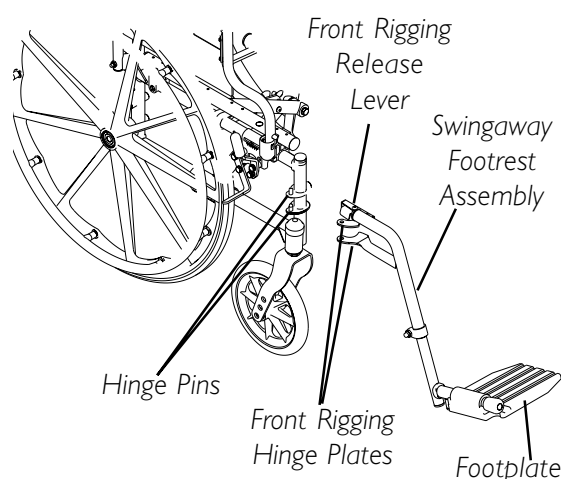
INSTALLING/REMOVING THE FRONT RIGGINGS
